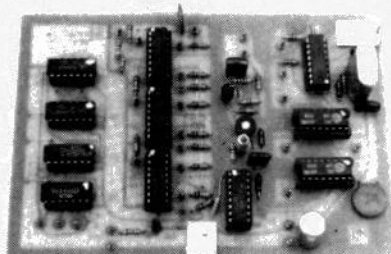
TOP VIEW of the digital board. The white pieces at bottom center and top right corner are metal mounting brackets.
